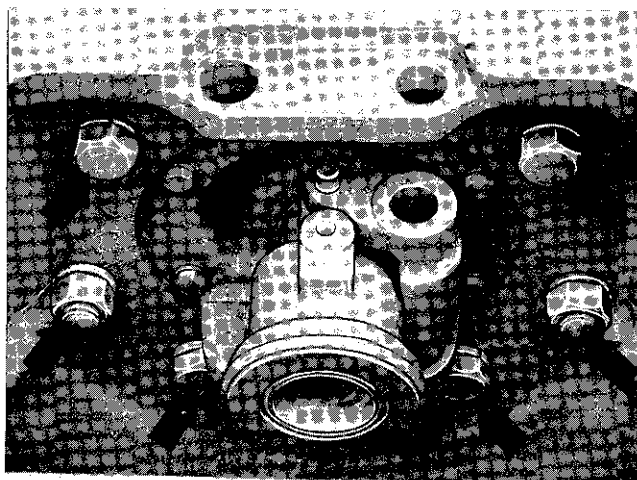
Clutch Throw-Out Bearing Assembly and Housing Attaching Hardware
